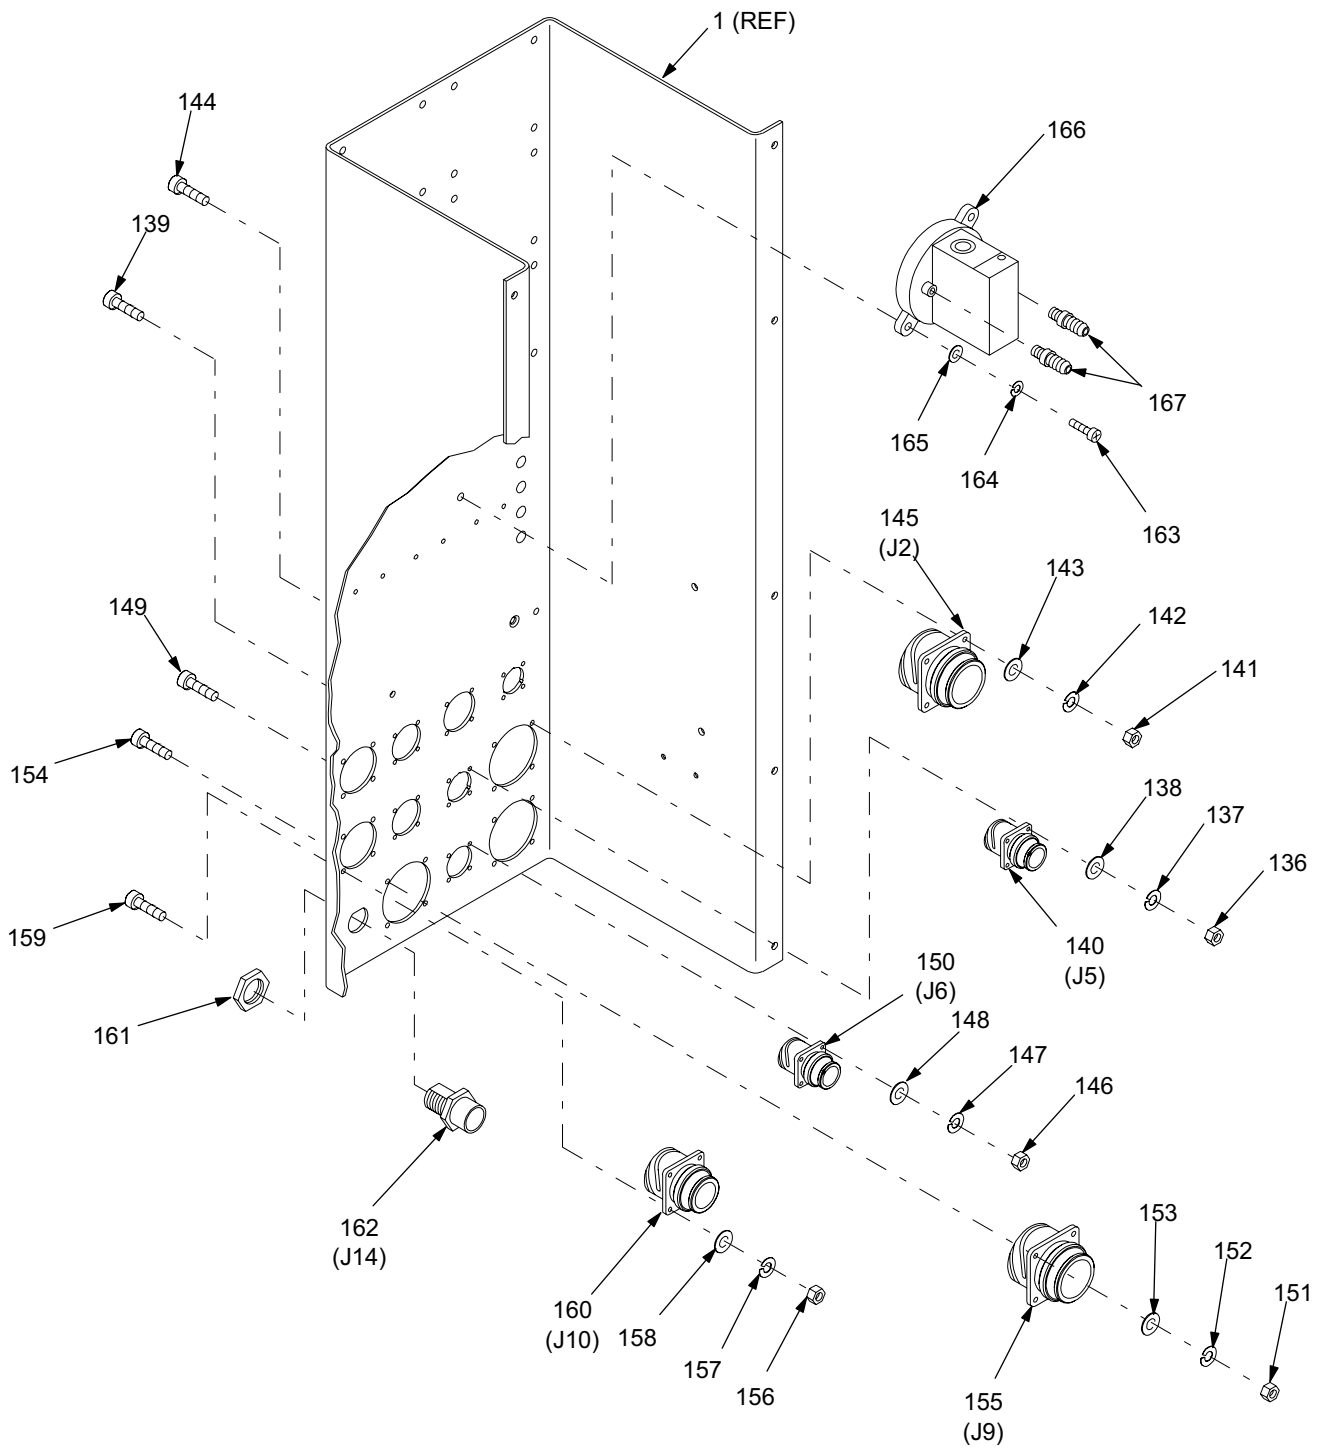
Pan Assembly Replacement (Sheet 3 of 6)
